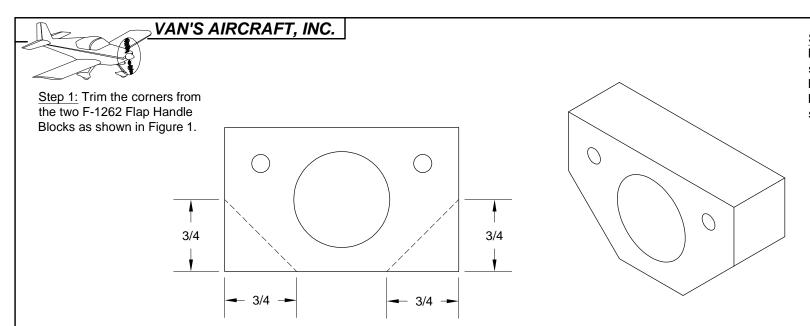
TRIMMING THE F-1262 FLAP HANDLE BLOCKS
